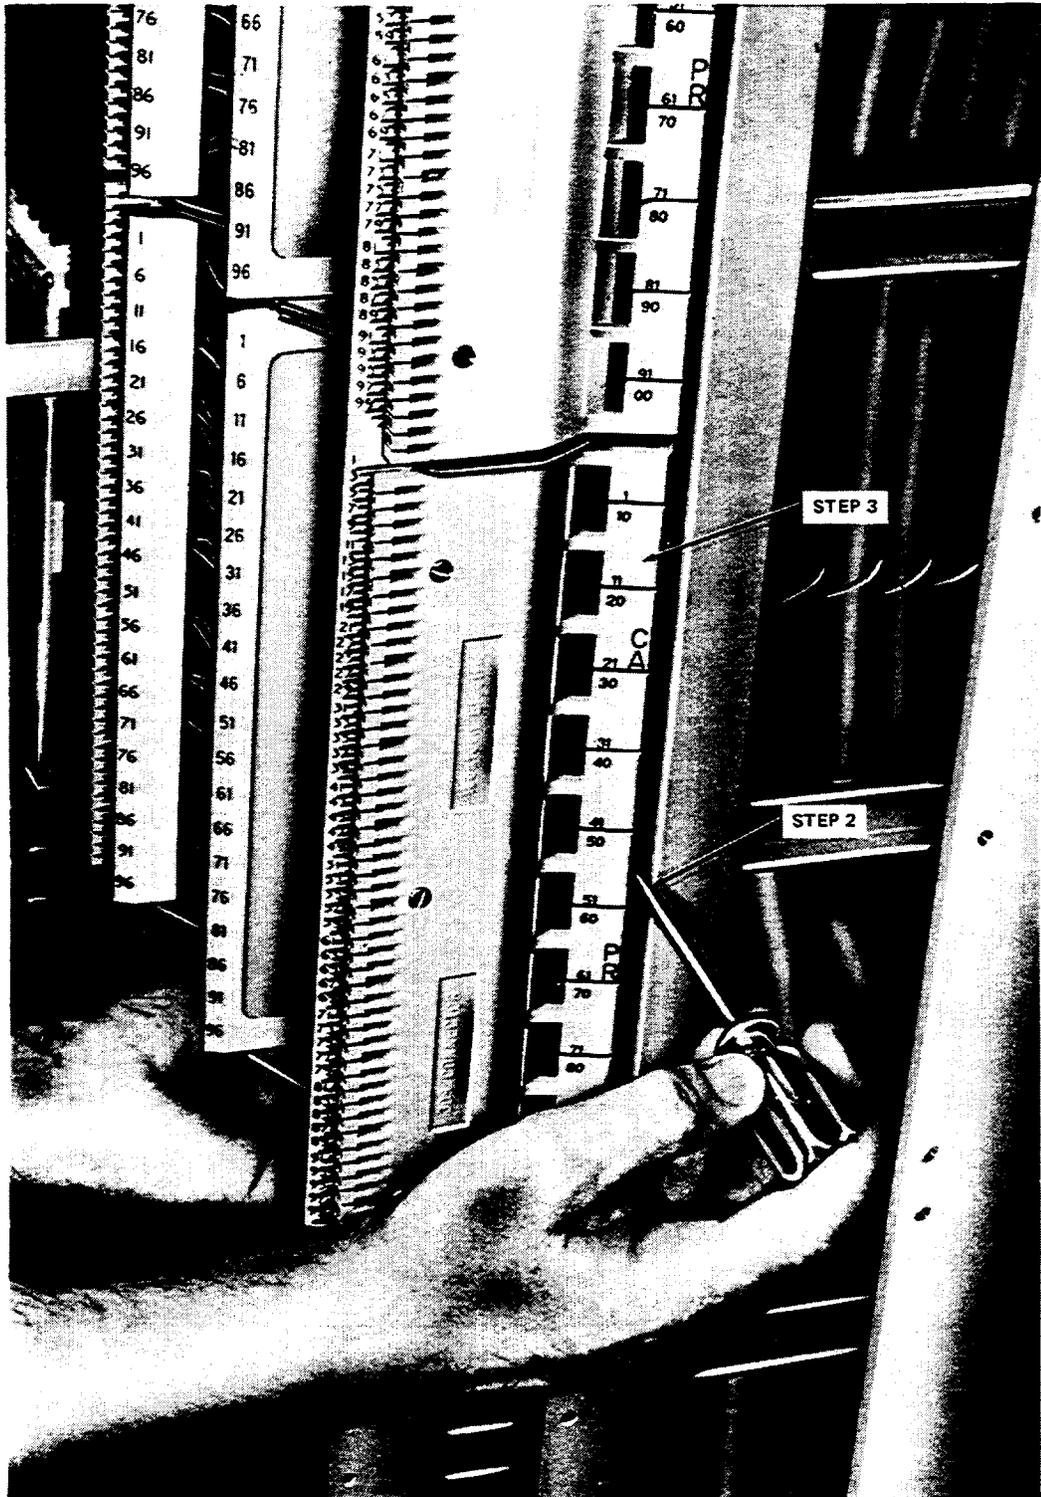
Aligning Mounting Screws Onto Frame (Right Connector)
